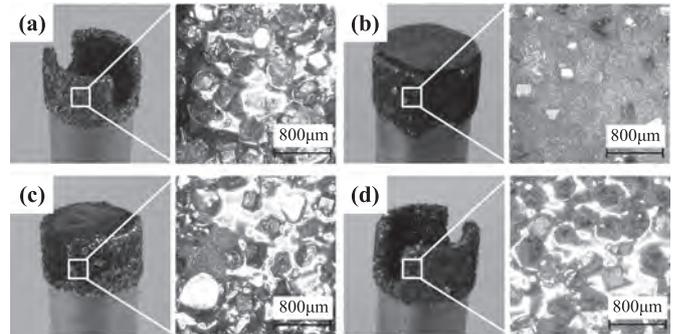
Morphology of a new tool and the tools after drilling using different cooling methods [154]: (a) new tool; (b) no cooling; (c) external air cooling; (d) internal air cooling.
